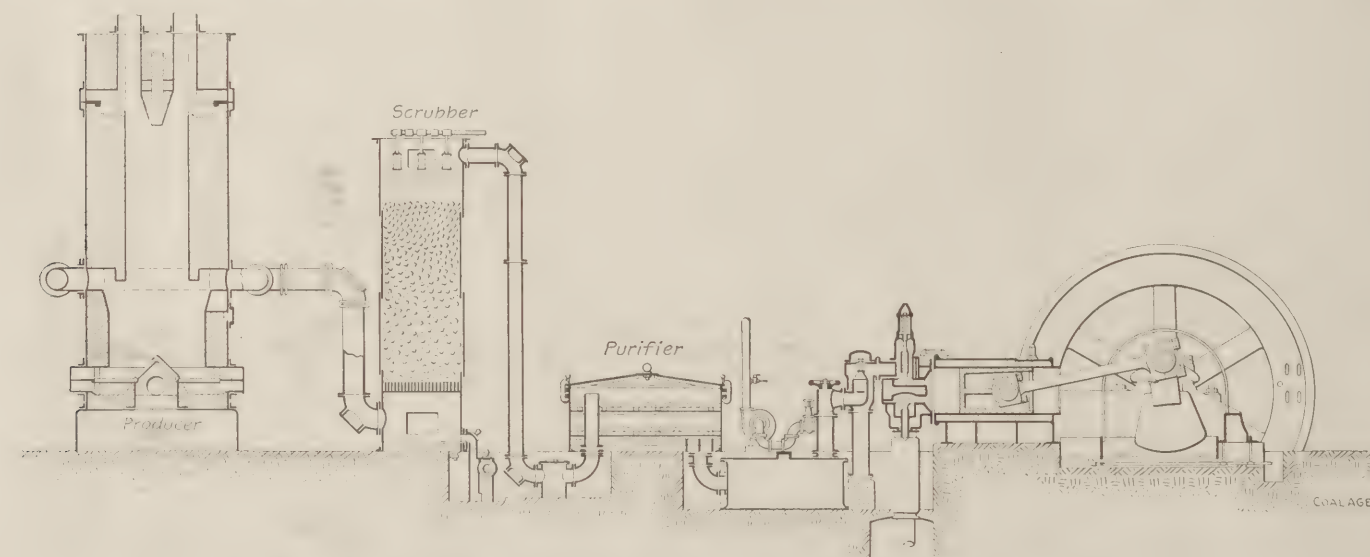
SHOWING SECTIONAL VIEW OF DOUBLE-ZONE SUCTION TYPE OF PRODUCER
